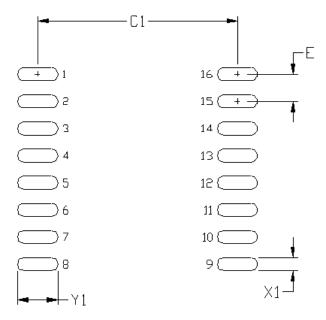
PCB Land Pattern: 16-Pin Wide Body SOIC
